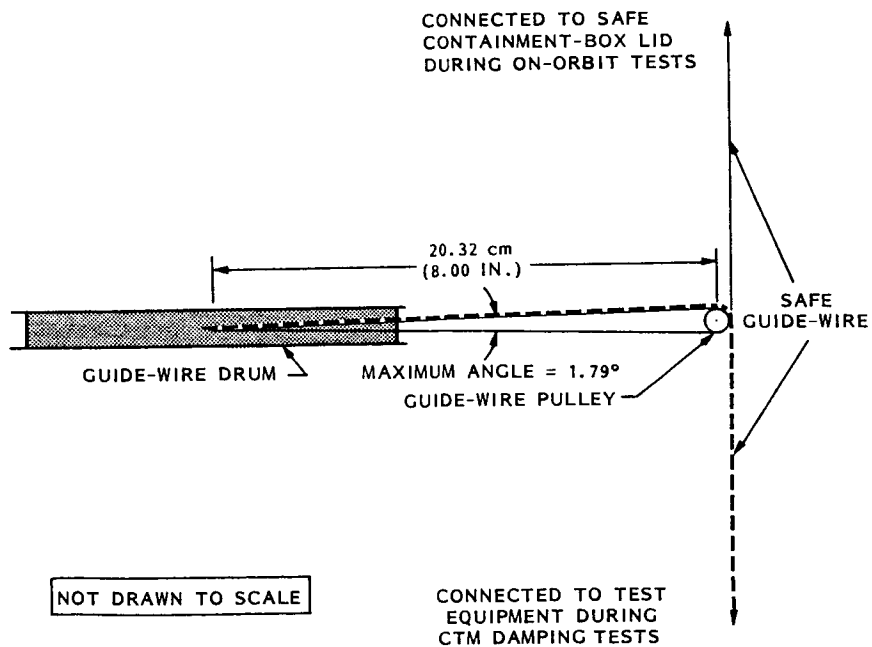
Guide-wire paths during on-orbit and CTM damping tests.
